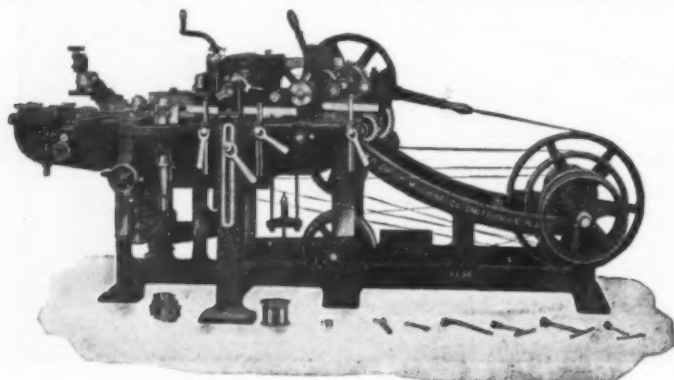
NEW SIX INCH OUTSIDE MOLDER.
